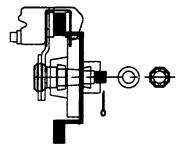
Brake Actuator & Coupling Assembly and Disc Brake
